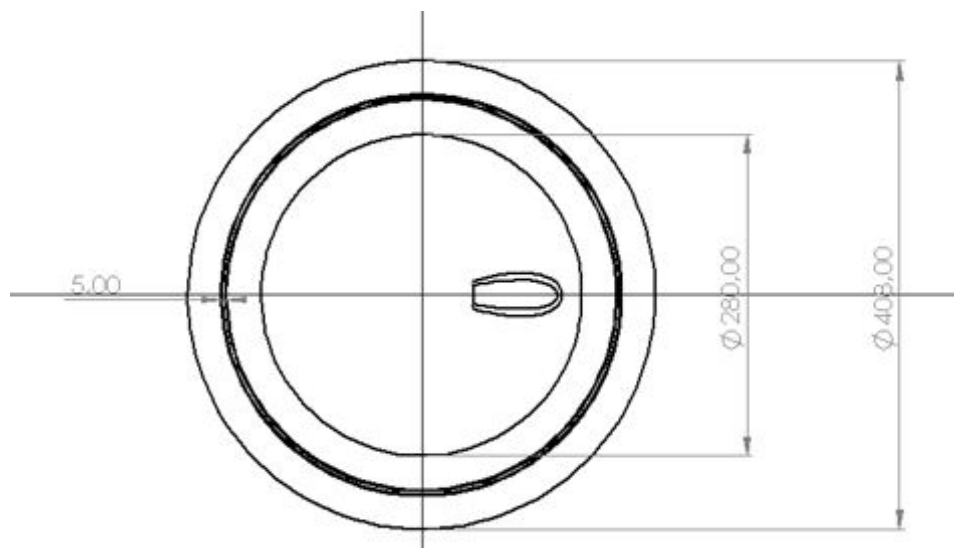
Bottom view drawings of the dome design. Dimensions in micrometres [μm].
